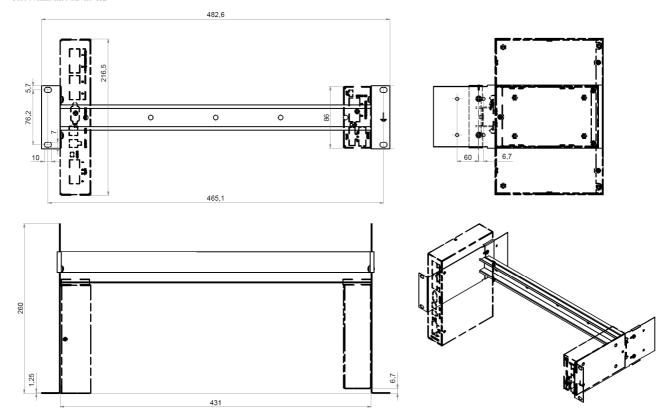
Mechanical Drawing of FG-RAIL-R-2U
